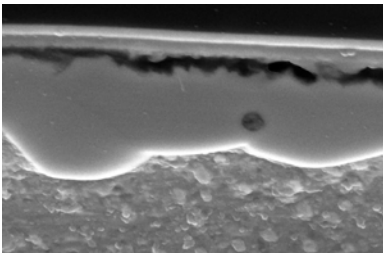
Open failure caused by separation of solder/IMC from UBM.
